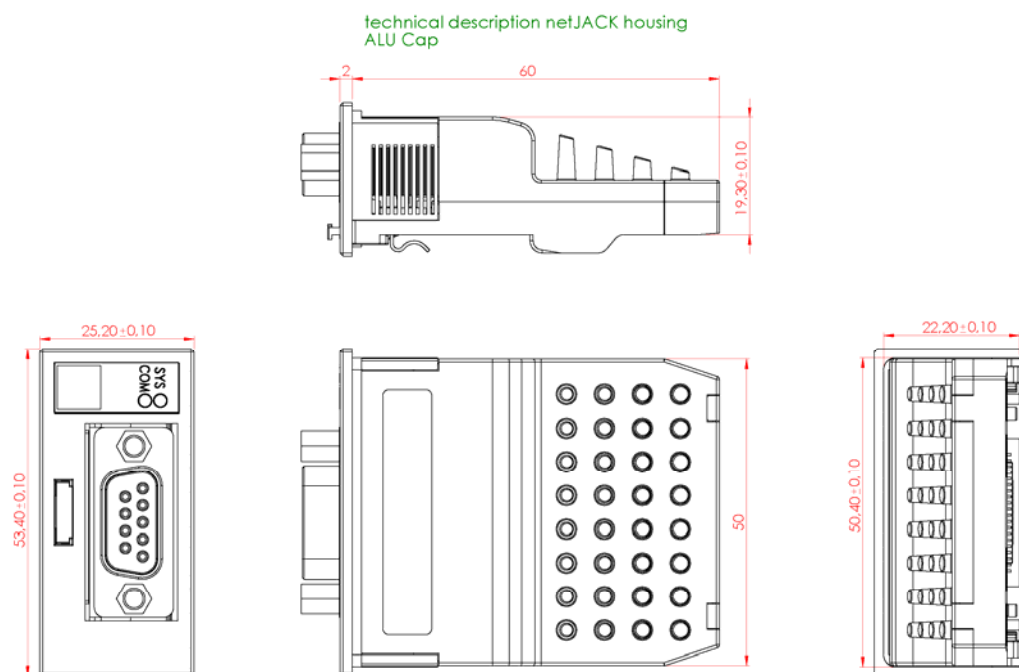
Dimensions of netJACK Module – Housing with Aluminum Cap
